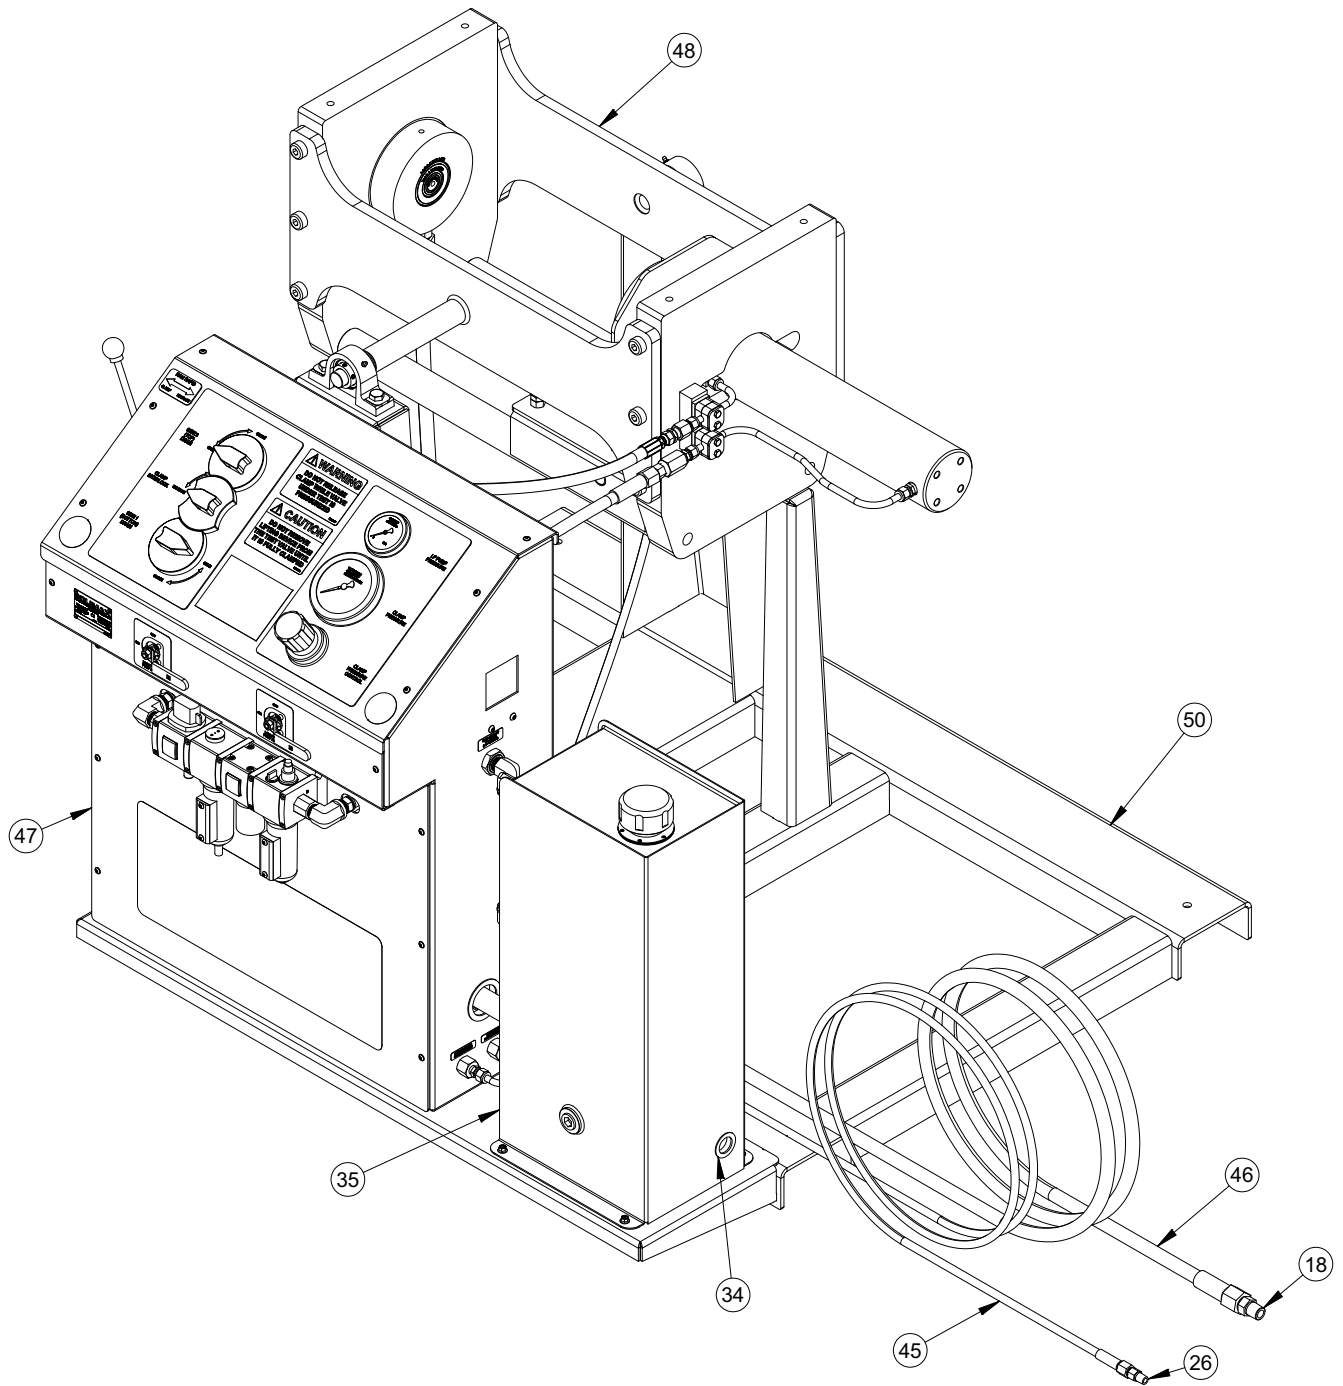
USV-2-25T ASSEMBLY 2 (P/N 90206)
